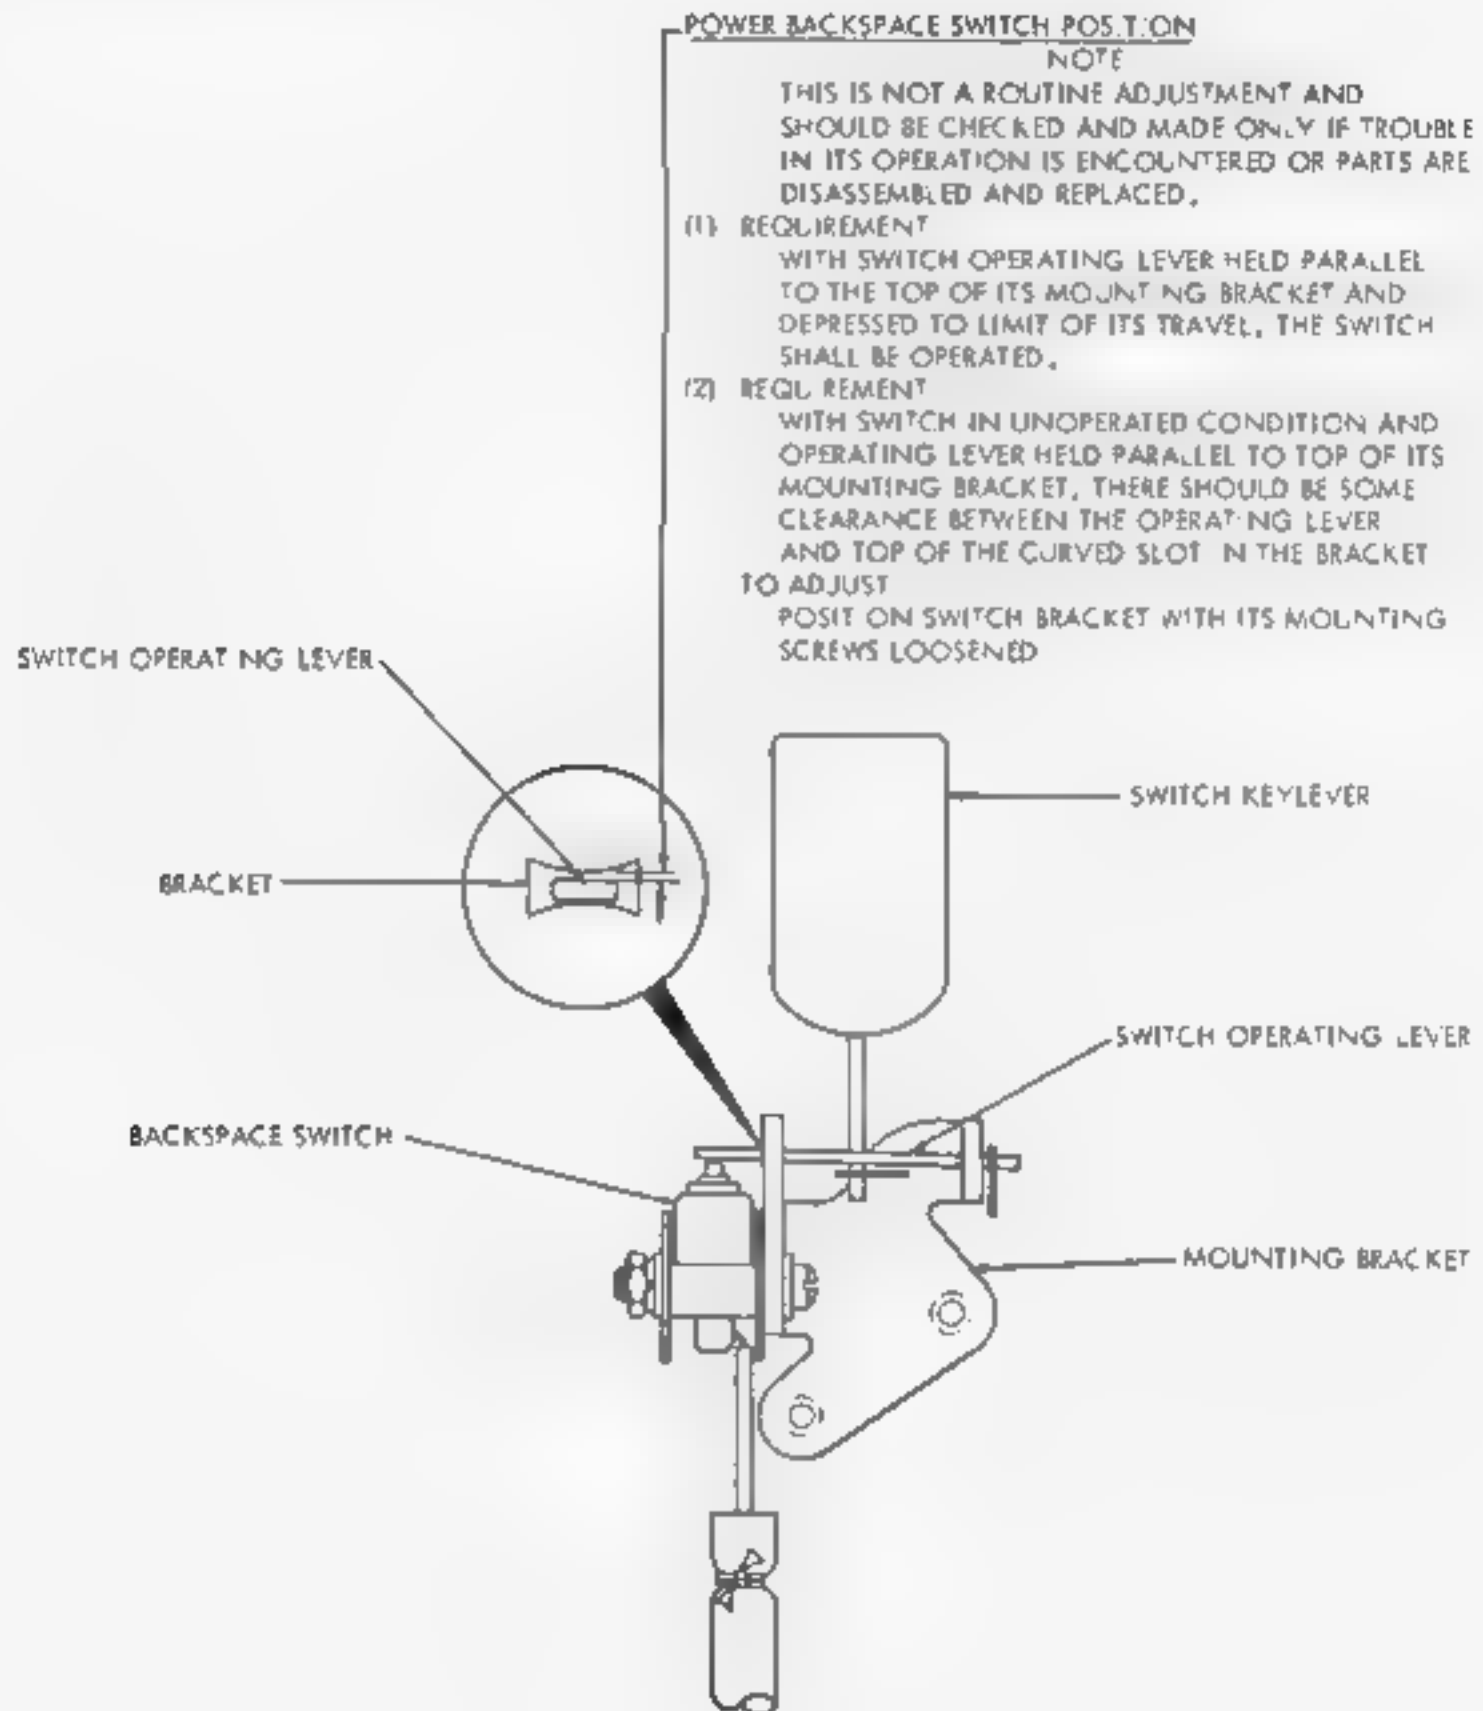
KEYBOARD POWER BACKSPACE SWITCH
